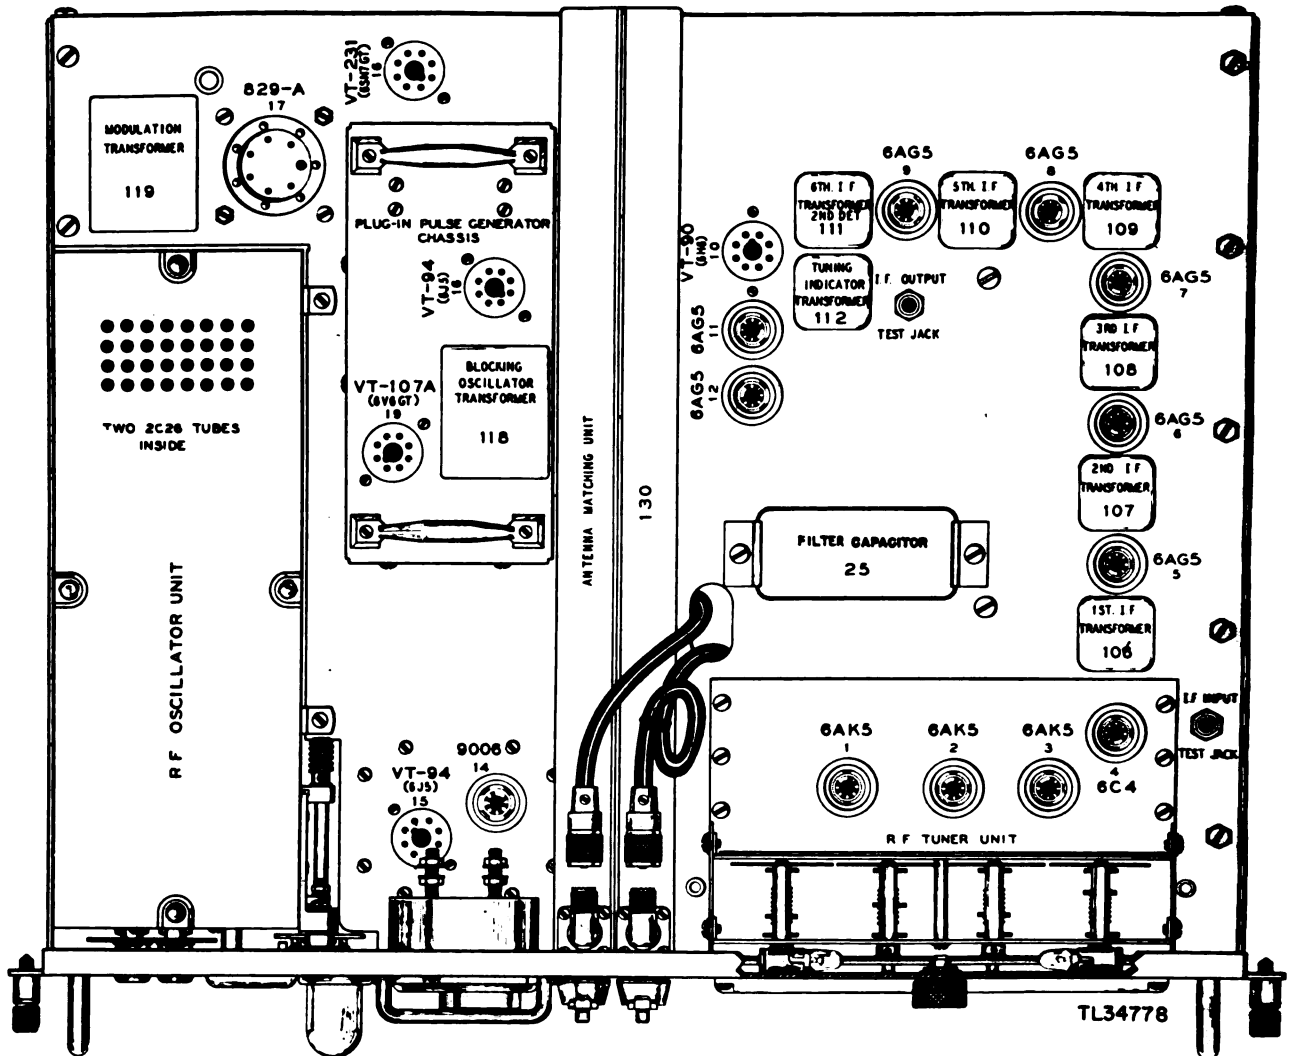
Radio Receiver and Transmitter BC-1267-A, top view showing location of parts.
